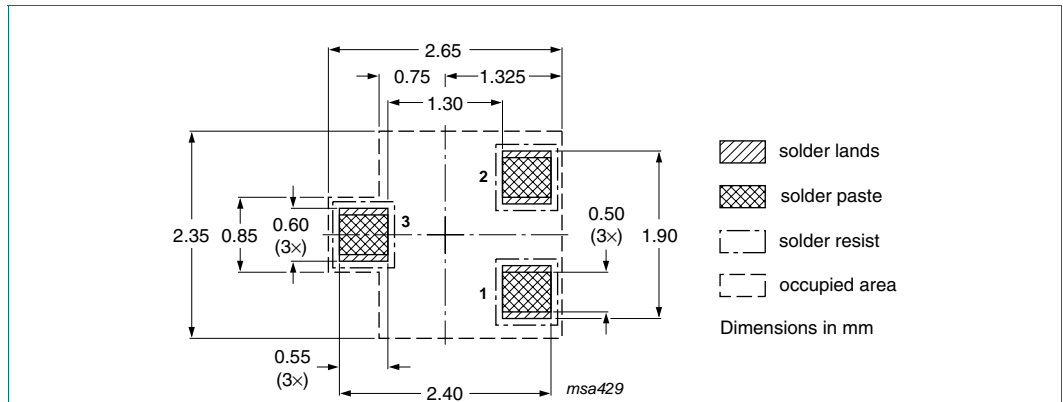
Reflow soldering footprint SOT323 (SC-70)
